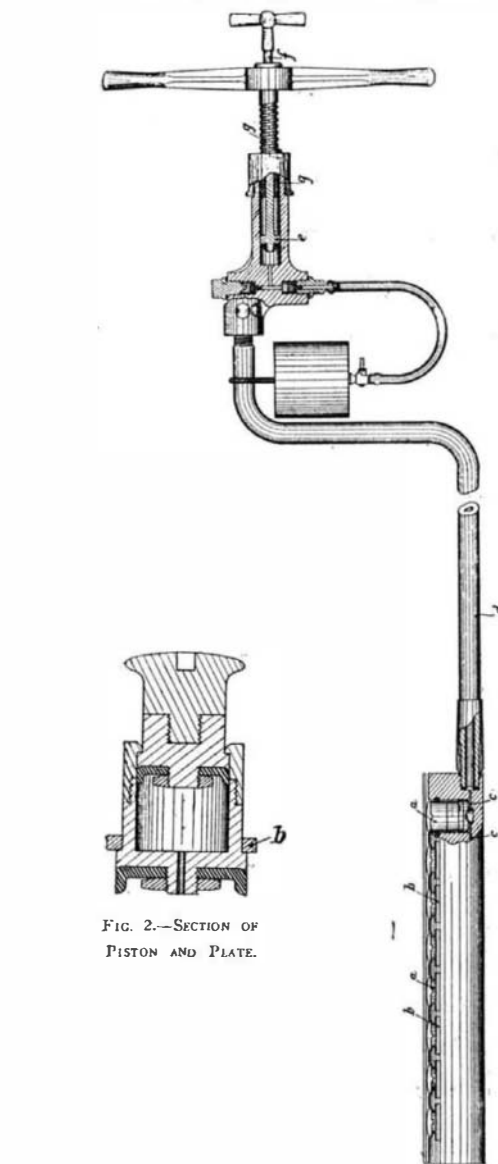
Sectional elevation of the hydraulic mining cartridge.
